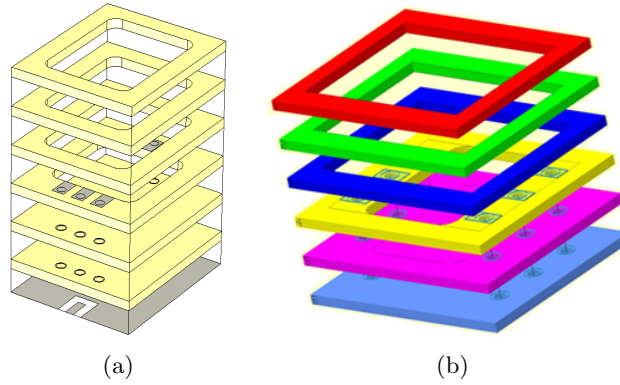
LTCC package proposed for SAW resonators: exploded views (a) and after assembly (b).
